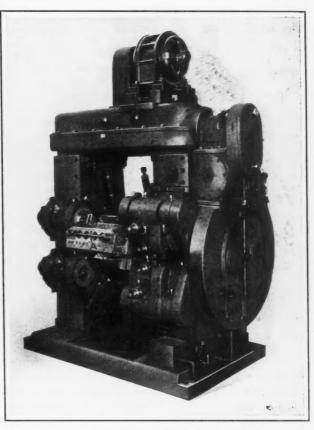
Another Continuous Drum Type of Milling Machine employed for finishing the Ends of the Cylinder Block
